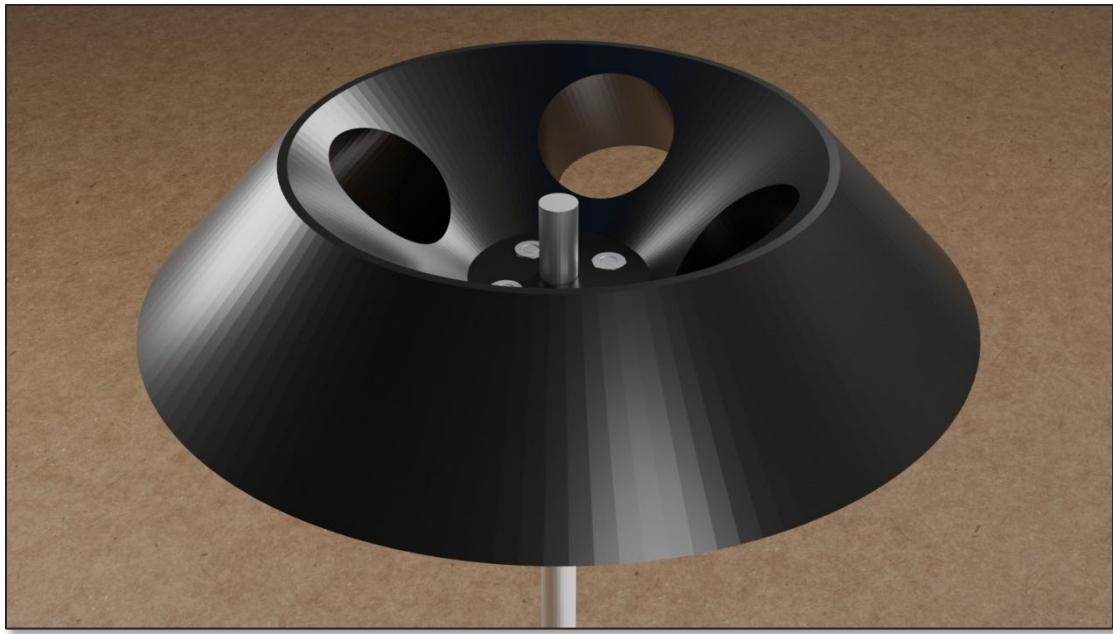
This image is showing how all parts are attached when we finished assembling the spinning test tube holder. Once again, the shaft is just for reference and should not yet be attached.
